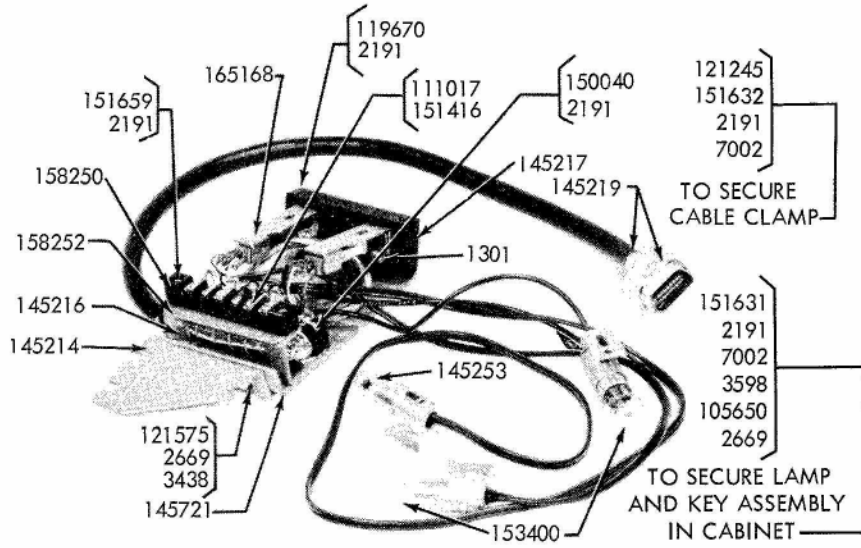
145220 MODIFICATION KIT TO PROVIDE KEY AND LAMP ASSEMBLY
